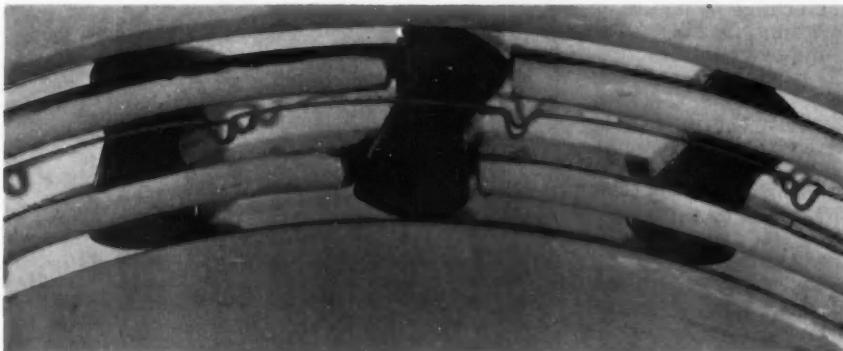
Fatigue life of overrunning clutch elements, such as the sprag type shown here, is determined in a stroking fixture completely automatic in operation.
